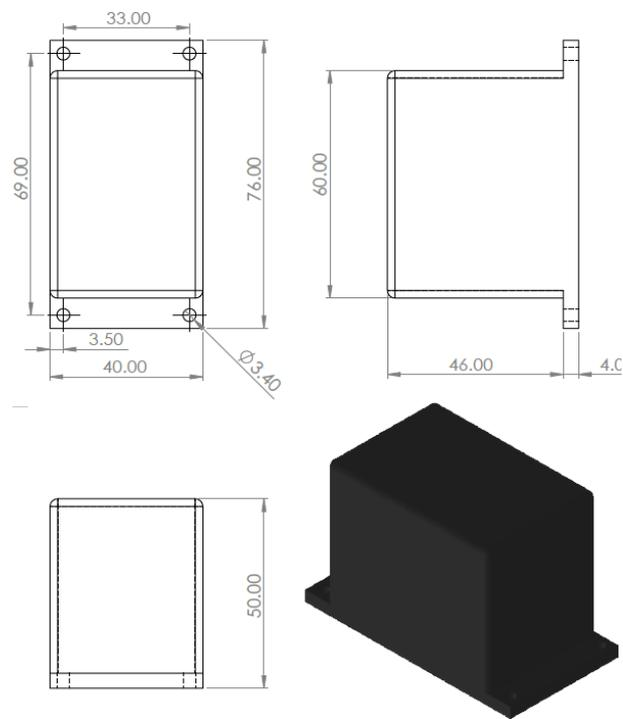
Measuring box dimensions. All dimensions are presented in mm.
